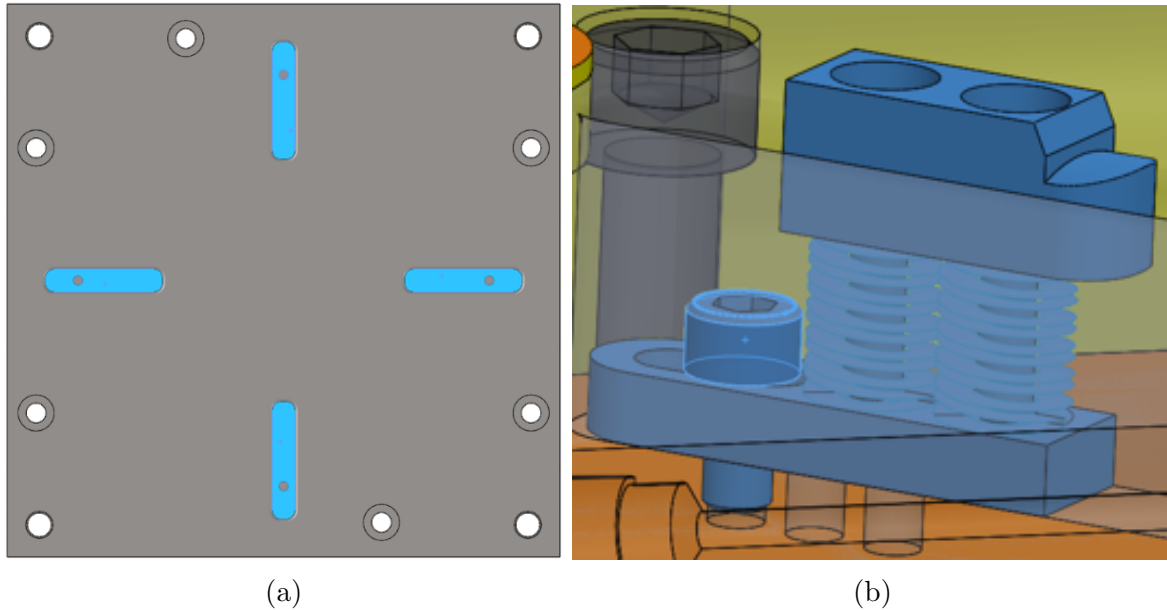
(a) View of lower die from perspective of blank and (b) spring lifter assembly.
